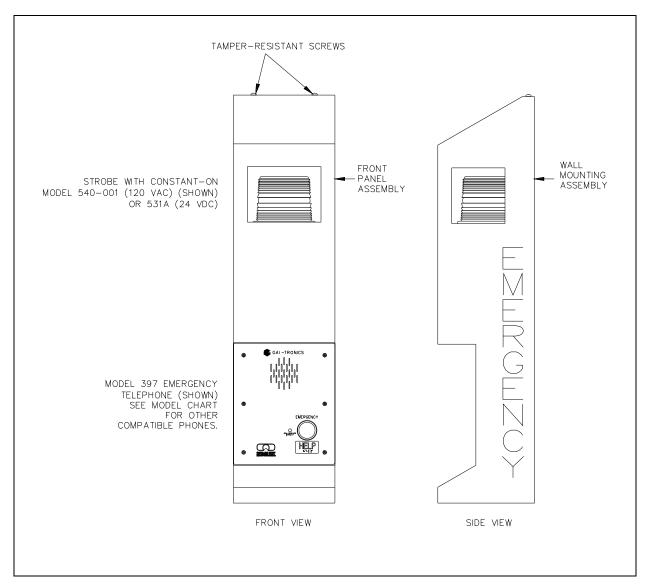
Model 234WM-202 Wall-Mount Stanchion Assembly
